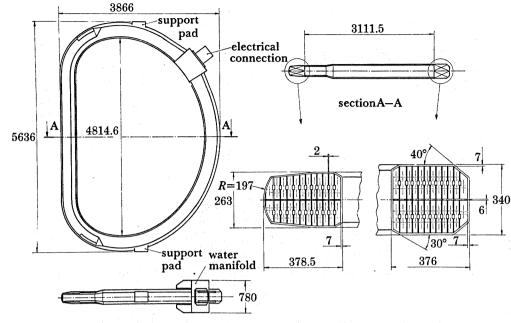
A JET toroidal-field coil (all dimensions are in millimetres).
